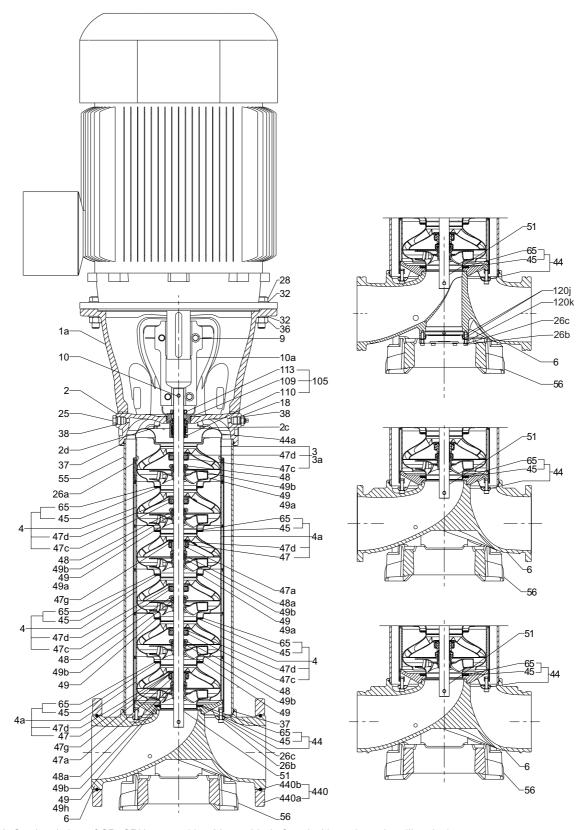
Sectional view of CR, CRN pump with \varnothing 22 shaft and without thrust-handling device
